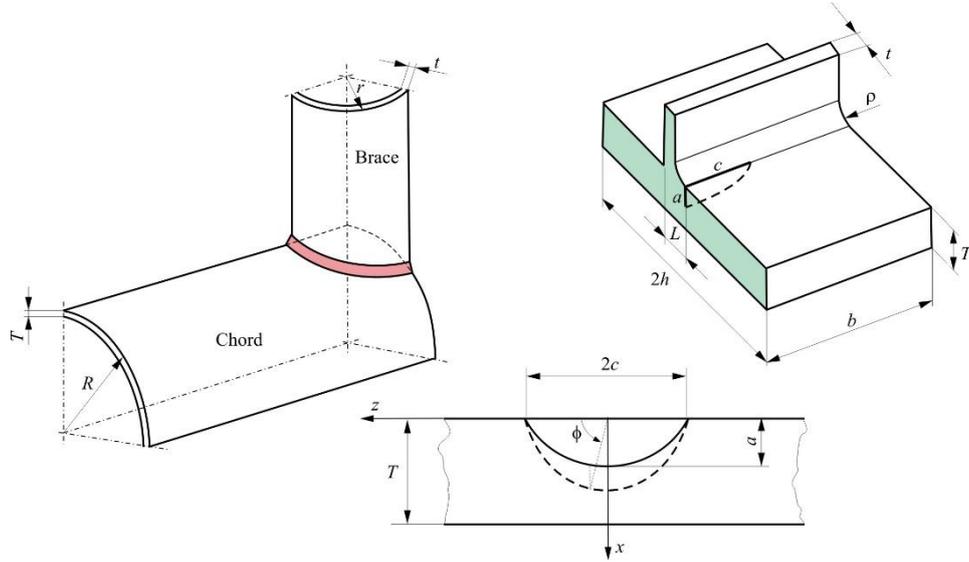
Tube joint with the semi-elliptical crack along the weld's edge.
